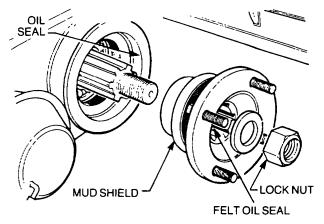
Output Shaft Cover Oil Seal Removal (Front)
